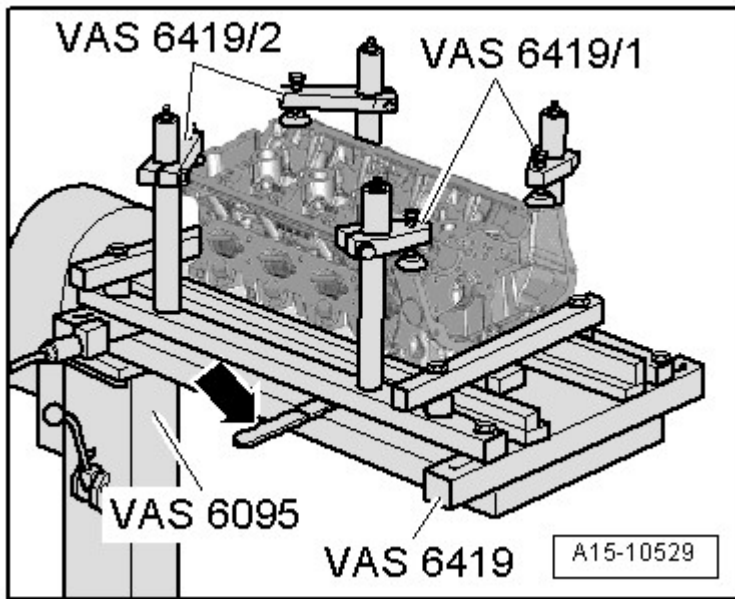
Identifying Cylinder Head Tensioning Device VAS 6419
